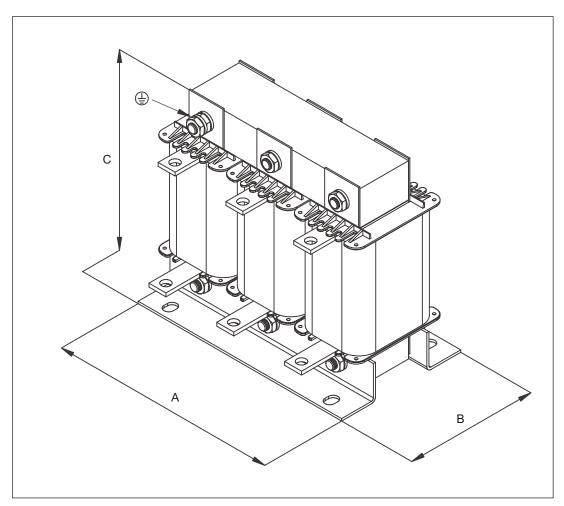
Dimension drawing: Line reactor, frame size FSF
